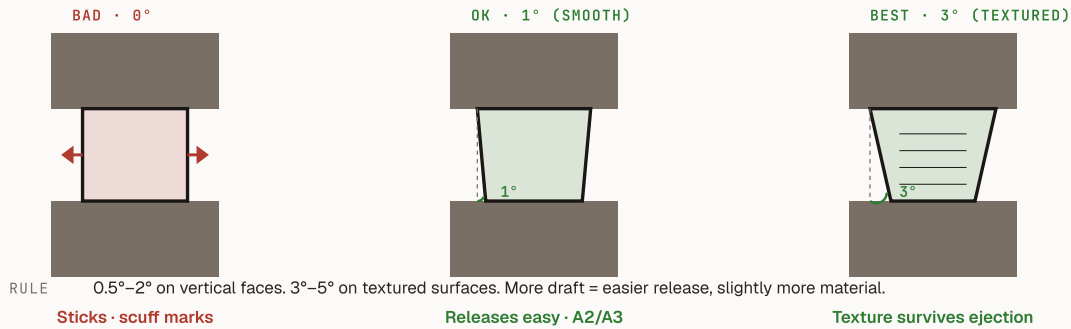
DRAFT ANGLE = MOLD RELEASE GEOMETRY. 0° CAUSES SCUFF MARKS DURING EJECTION; 1-2° RELEASES CLEANLY ON POLISHED SURFACES; 3°+ REQUIRED ON TEXTURED.
